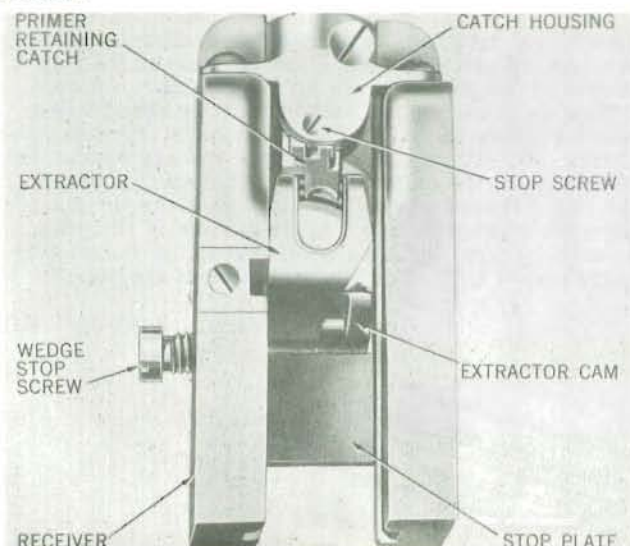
Firing Lock Mk 14 Mod 5 - Wedge Removed
